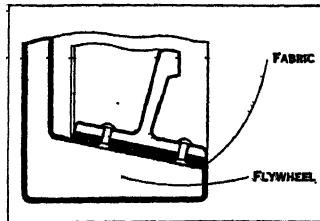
CONE CLUTCH FOR MOTOR LORRY OR MOTOR TRUCK
